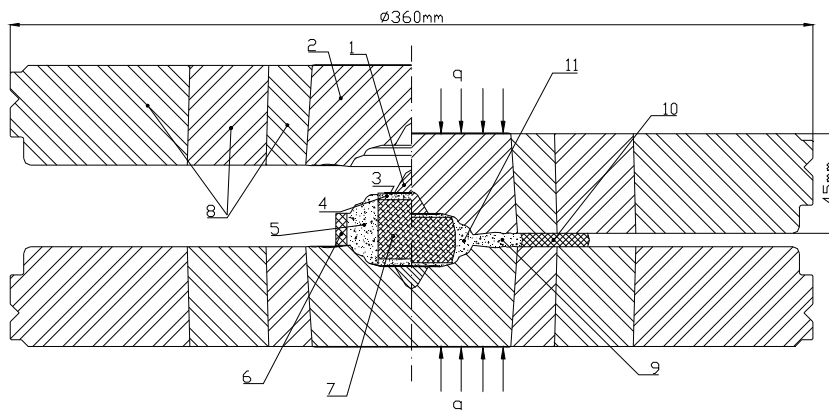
Scheme of the gasket inside the HPD. (1) protective molybdenum cone; (2) anvil; (3) graphite disc; (4) alumina disc; (5) gasket prior to loading; (6) PVC ring; (7) mixed powders; (8) multi-rings; (9) gasket under loading; (10) deformed PVC ring; (11) the most deformed region of the gasket; (q) applied load
